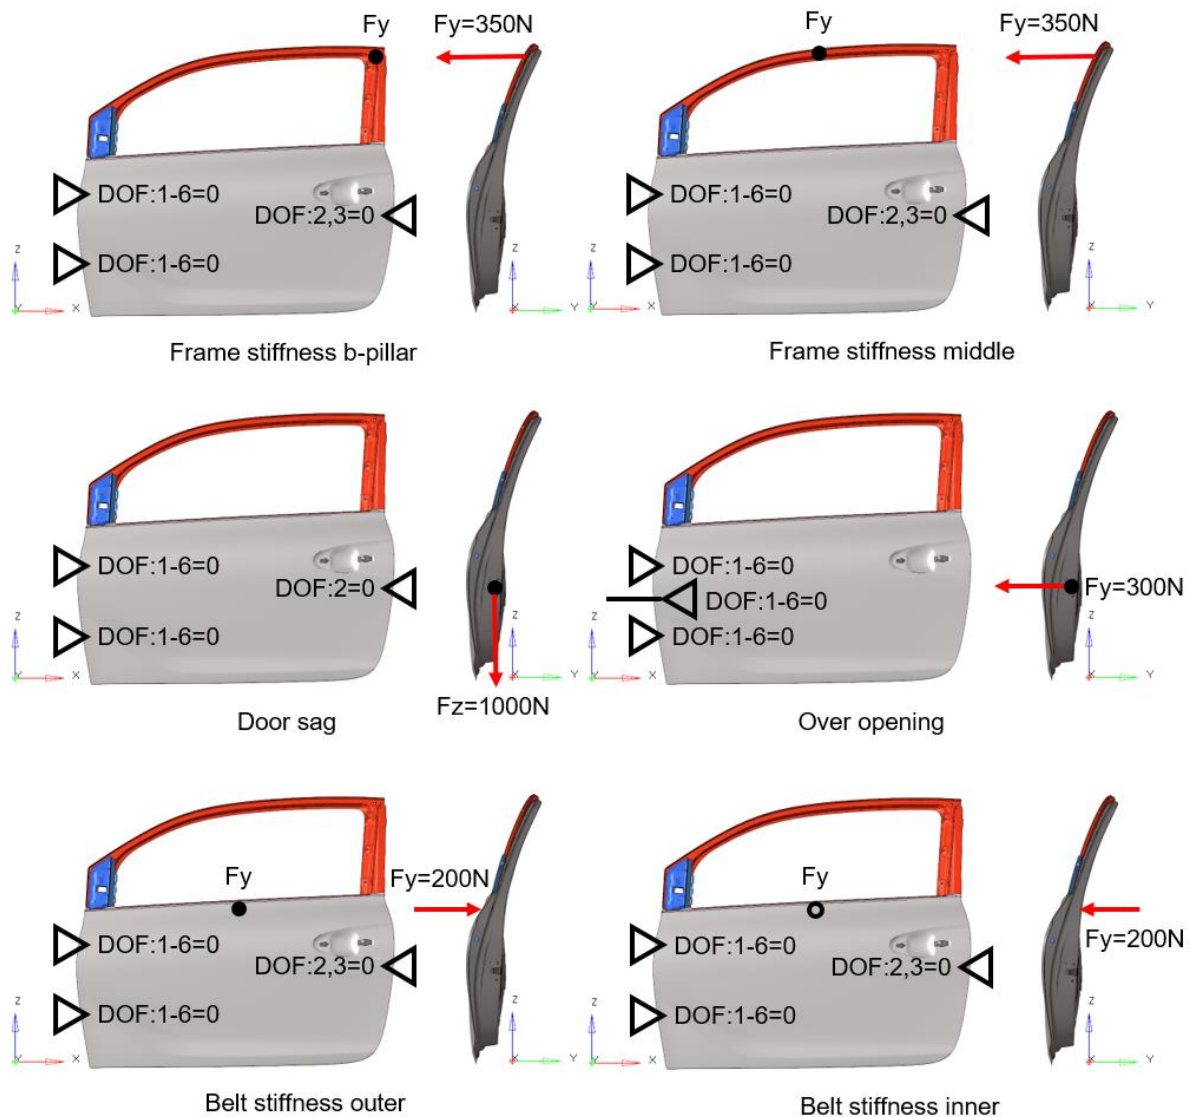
Six typical static loading cases with force levels and boundary conditions
